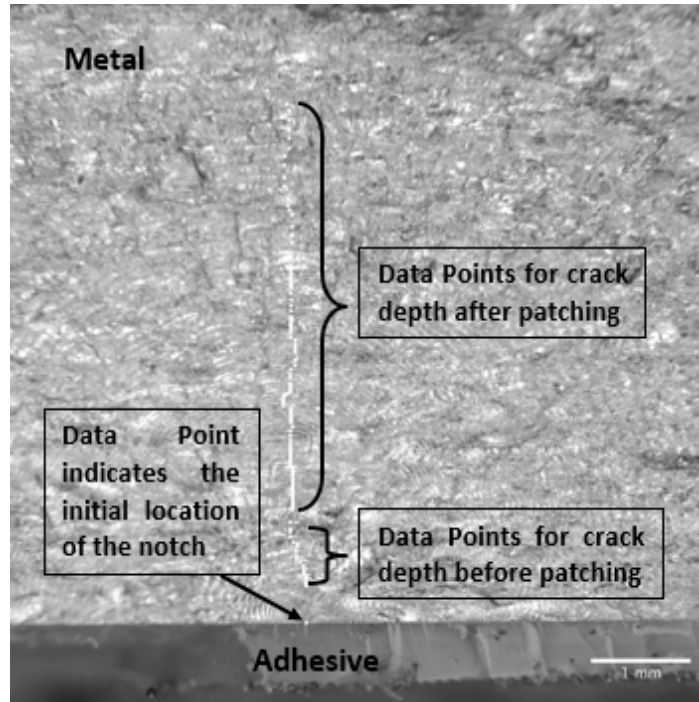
Fracture surface of Specimen 2 (left-hand side of Figure 6b). The locations at which the crack depth was measured are shown by the white points.
